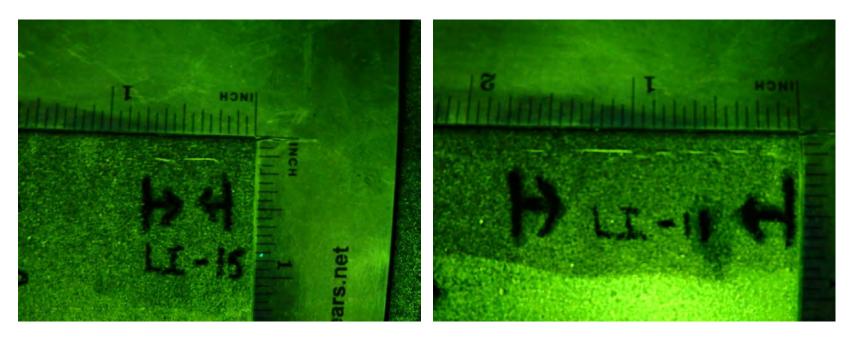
Photographs, provided from Dig RWVIM 160-13, showing representative linear indications identified using wet fluorescent magnetic particle inspection.
